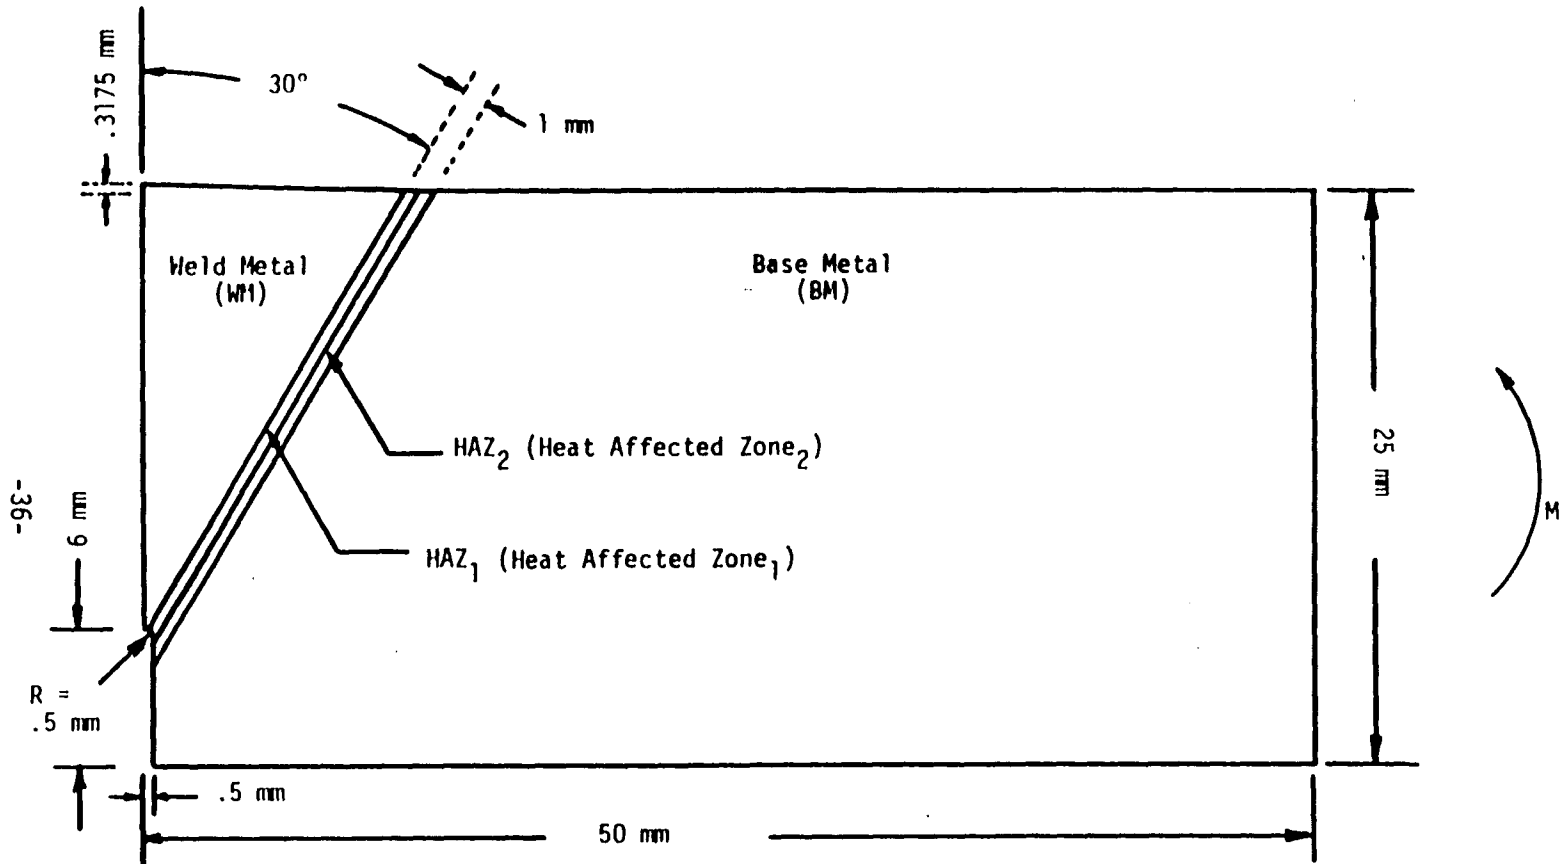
DIMENSIONS OF THE NOTCHED WELD JOINT
